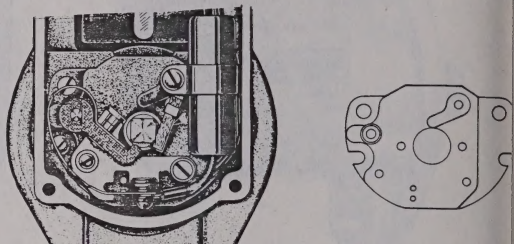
Bearing Support with and without Point Set, Condenser and Cam Wick
